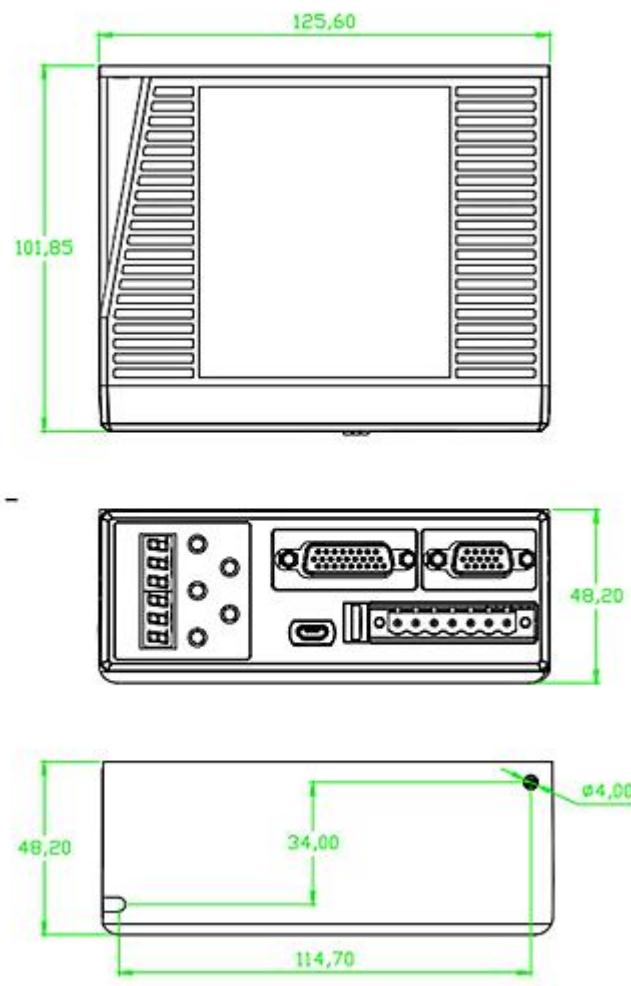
Machine dimension of JMC 2HSS458-R/RC Drive (unit: mm)
